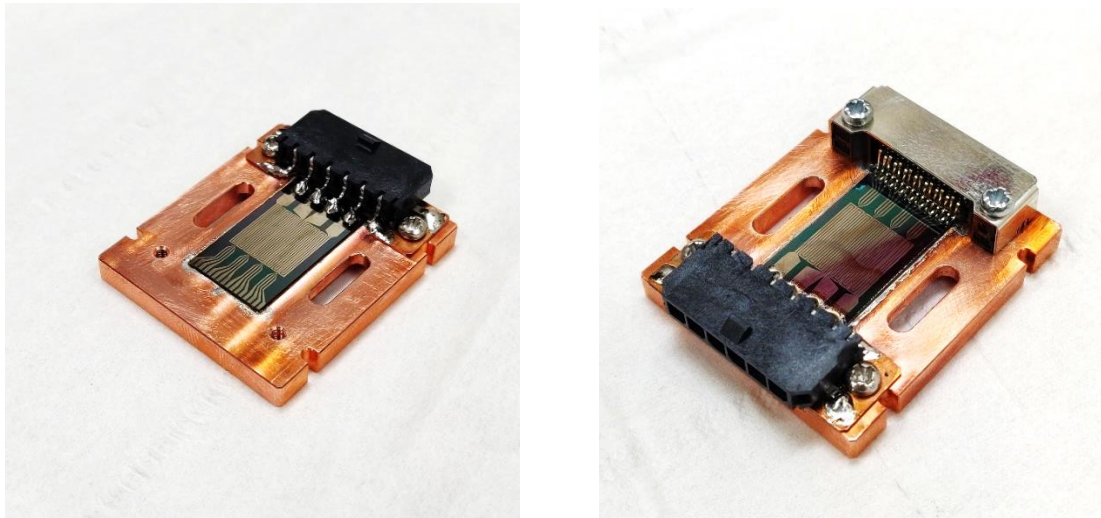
Heat sink assembly and the microheater connector for the power supply.
